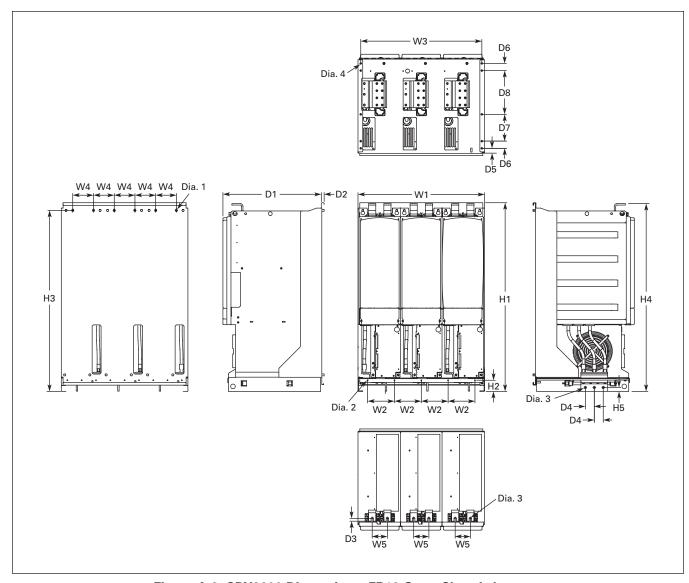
SPX9000 Dimensions, FR13 Open Chassis Inverter
